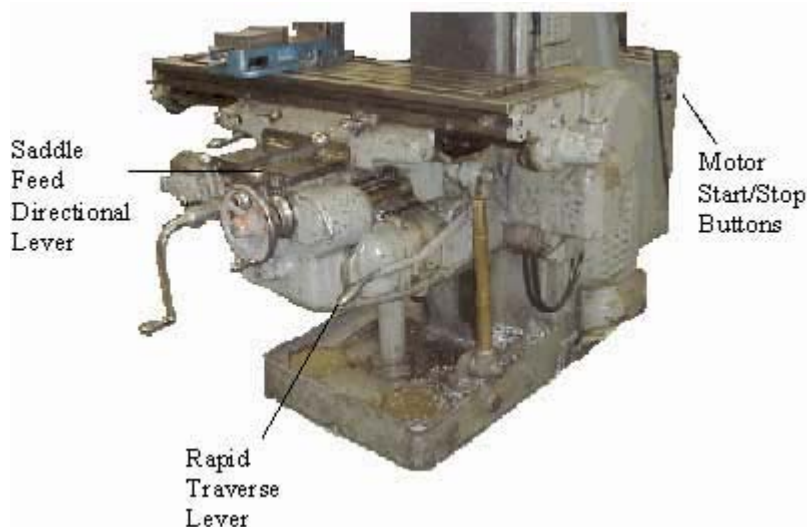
& 6: C-Frame Style Vertical Milling Machine Components
